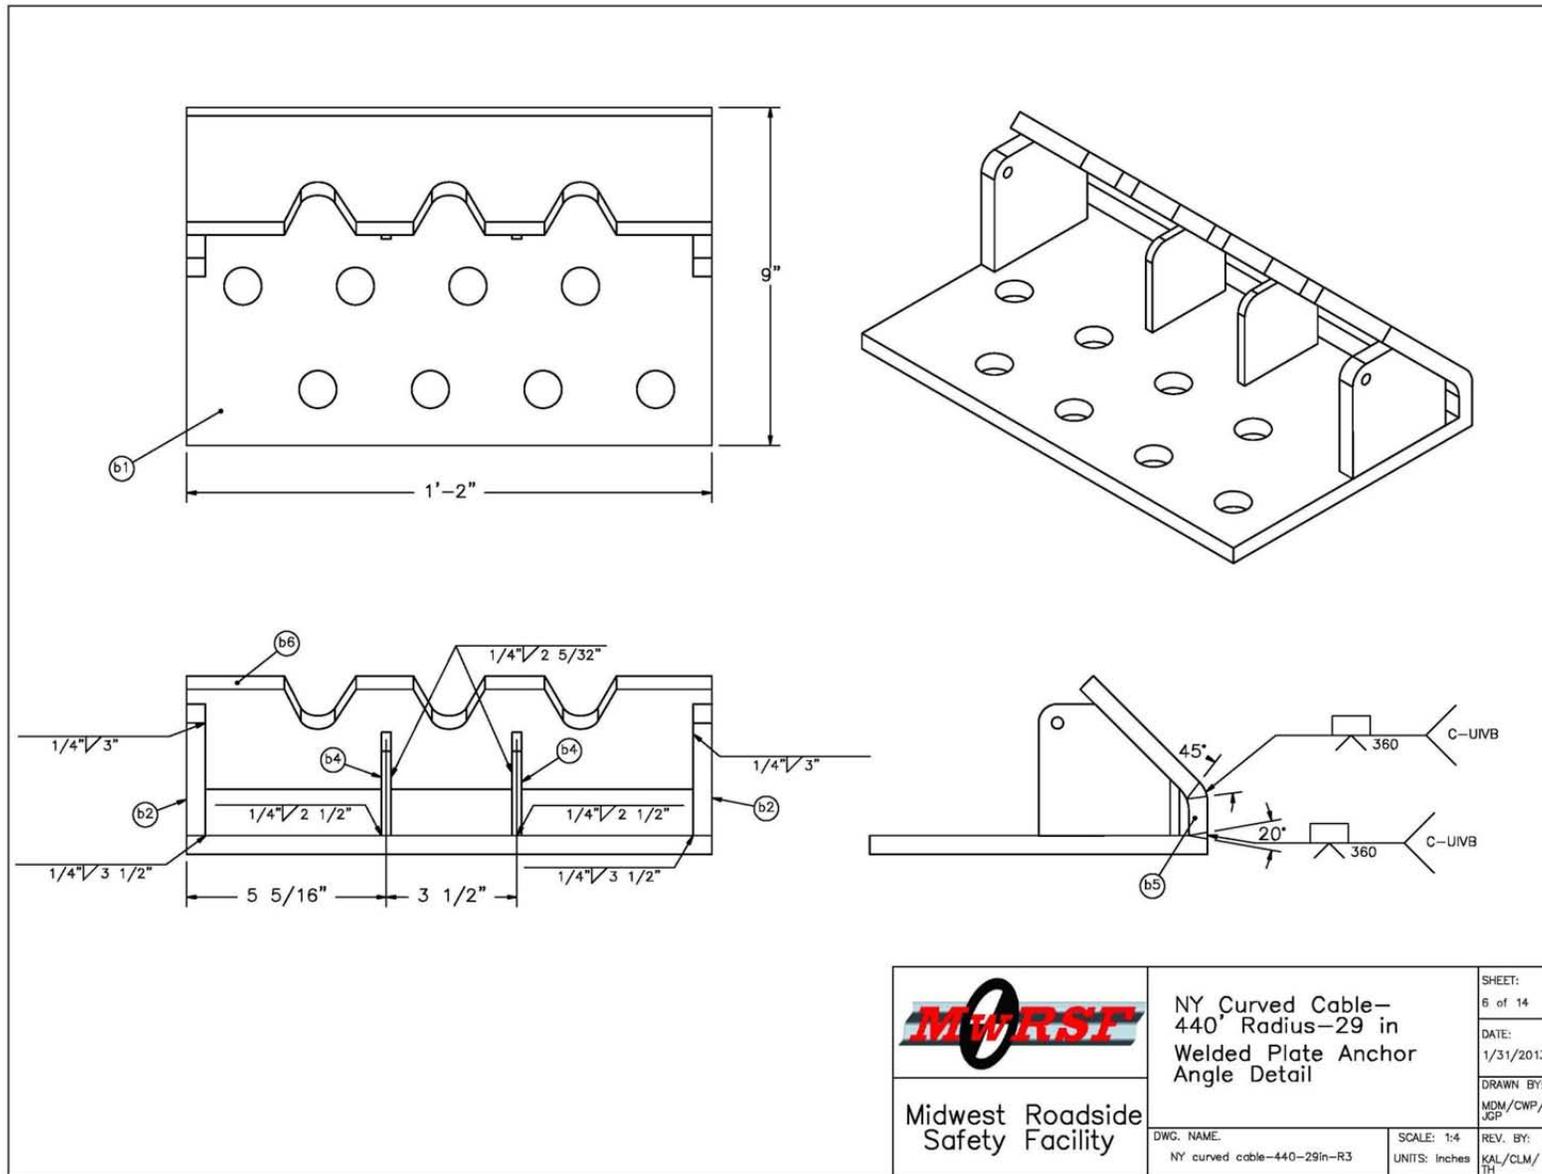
Cable Anchor Bracket Details, Test No. NYCC-3
